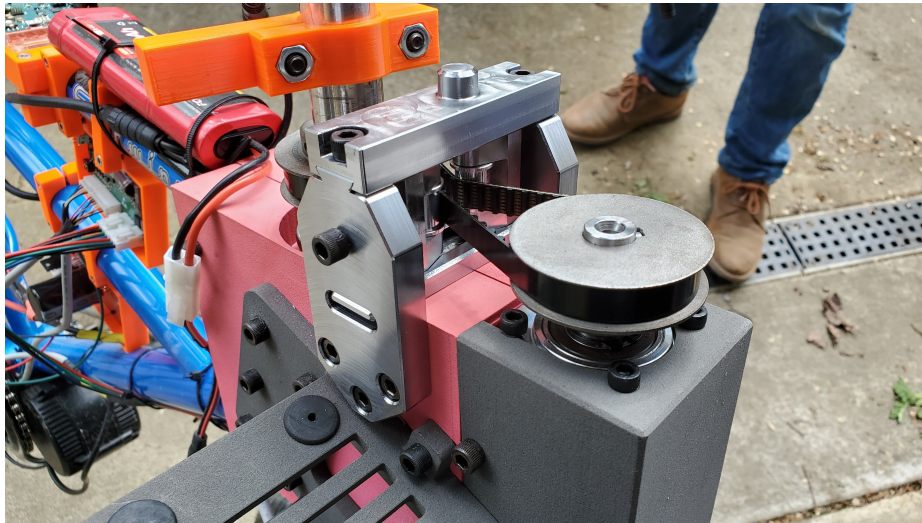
The assembled steel version of the tensioner and front wheel steering actuator.
